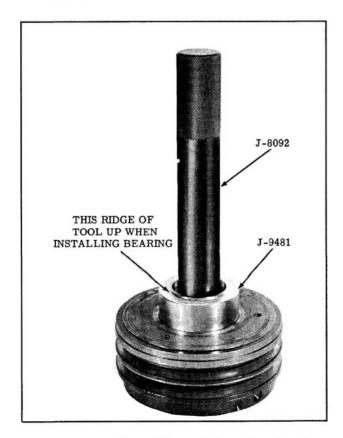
Installing Pulley and Drive Plate Bearing
